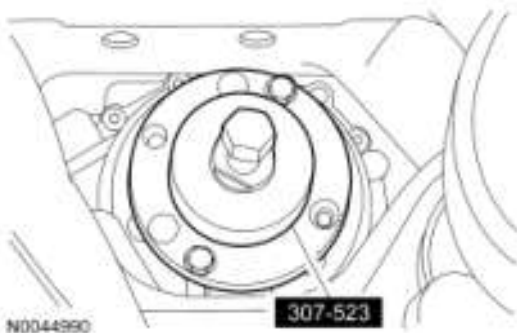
Removing Rear Output Shaft Flange Using Special Tool (307-523)
